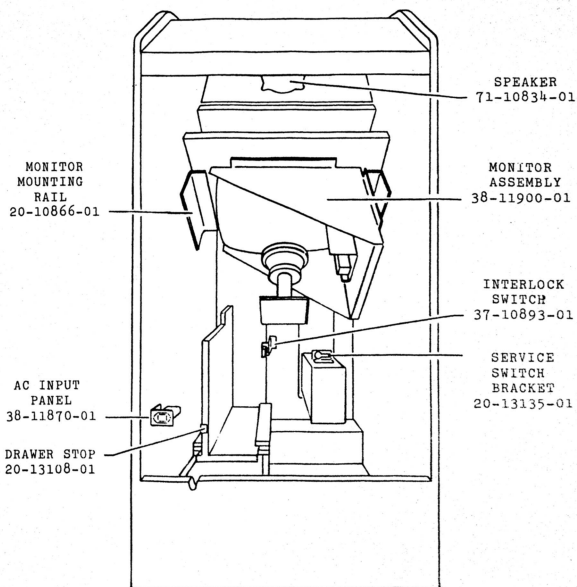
B: CINEMAT CABINET (REAR VIEW)
